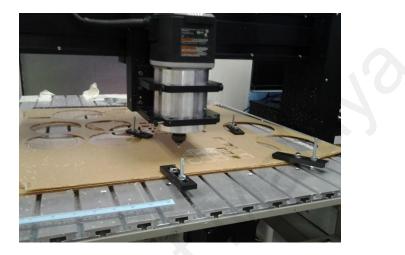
Cutting 2 mm thick of PMMA sheet using CNC machine.
